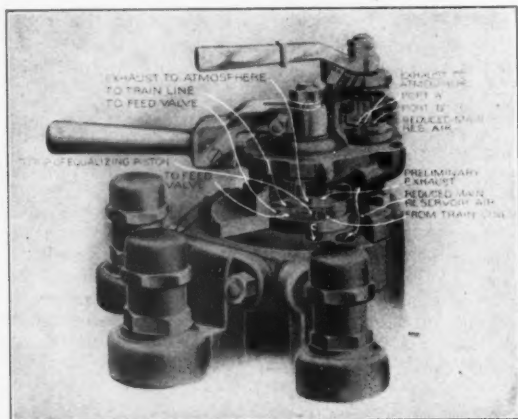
SECTION OF AUTOMATIC AND STRAIGHT AIR BRAKE VALVES.
